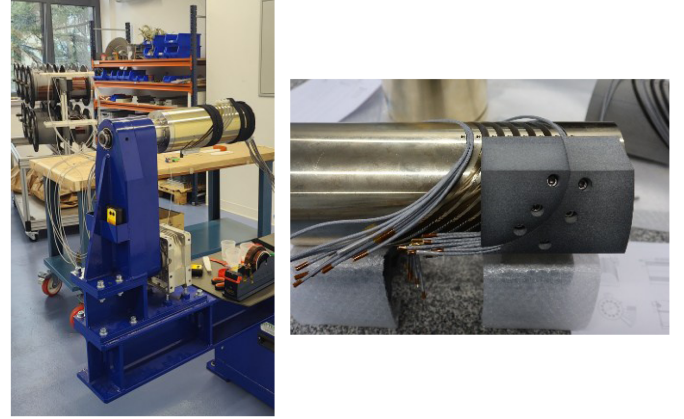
(Left) Winding machine (front) and spools holder (back) with mockup former. (Right) Mockup of layer jump test.
